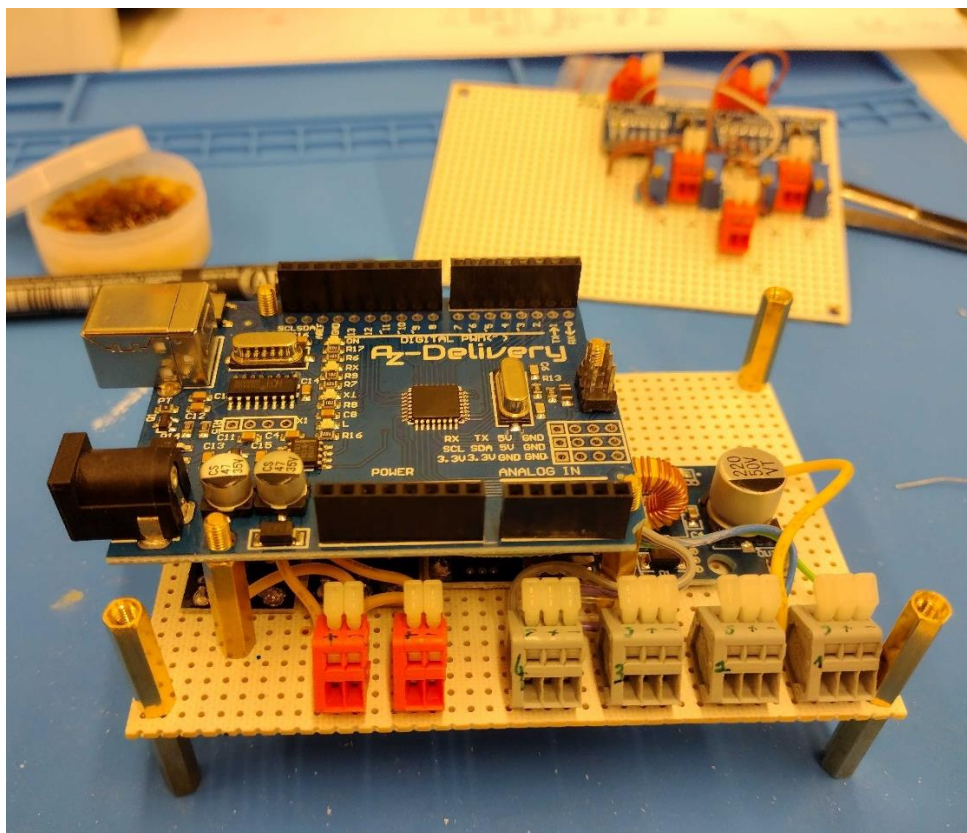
FSMCU circuits during construction, using prototype PCB boards.
